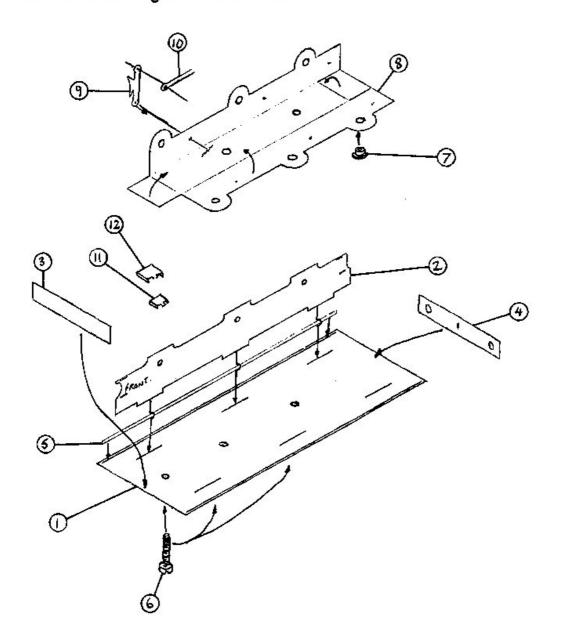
Main tank and upper body construction. (Low front type. Built 1928 - 37).
